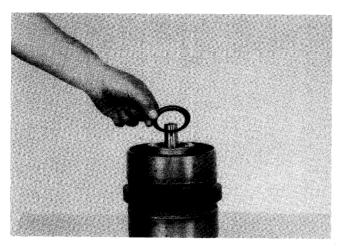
Position return spring retainer ring retaining washer on clutch shaft.
